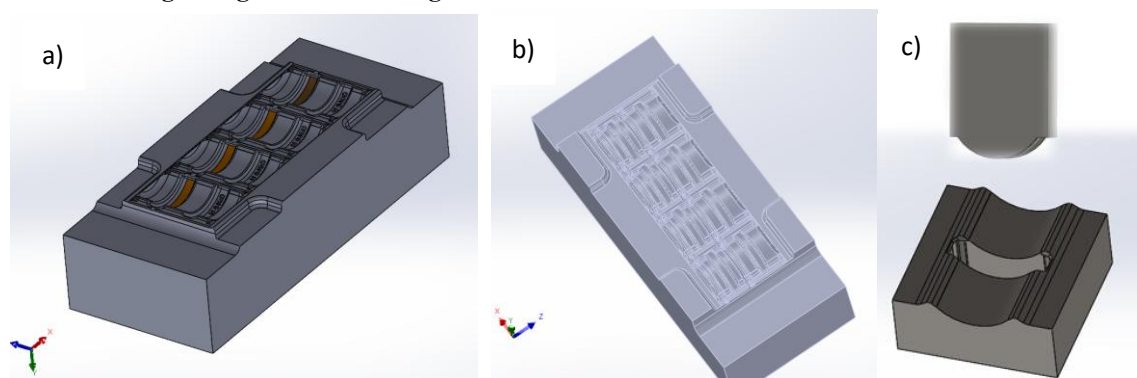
The view of a 3D model of forging tools: a) lower die, b) upper die, c) deburring tools.
